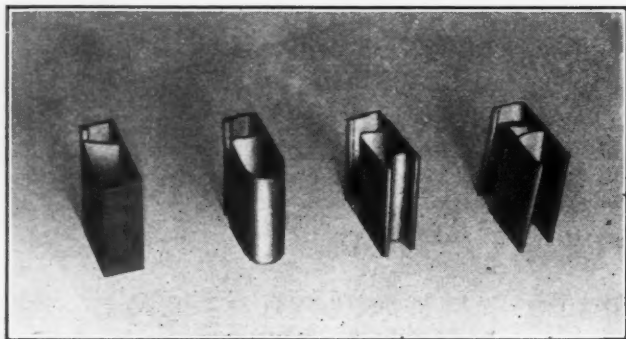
Sections of Sheet-metal Molding formed by rolling
